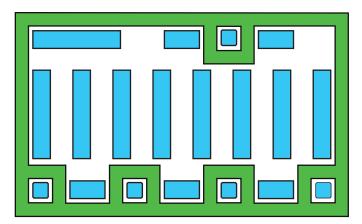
Solder Mask Superposed on Solder Stencil. (top view)
